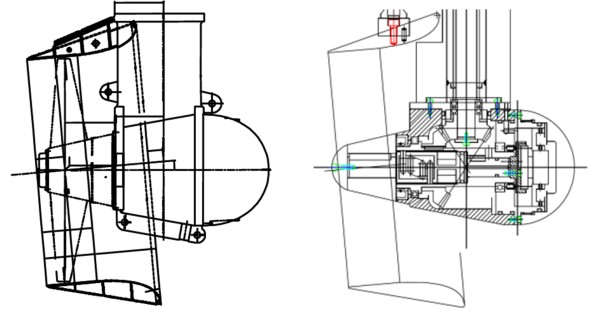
Assembling drawings of full and model scale azimuth thrusters of bevel gear type (full-left, model-right)
